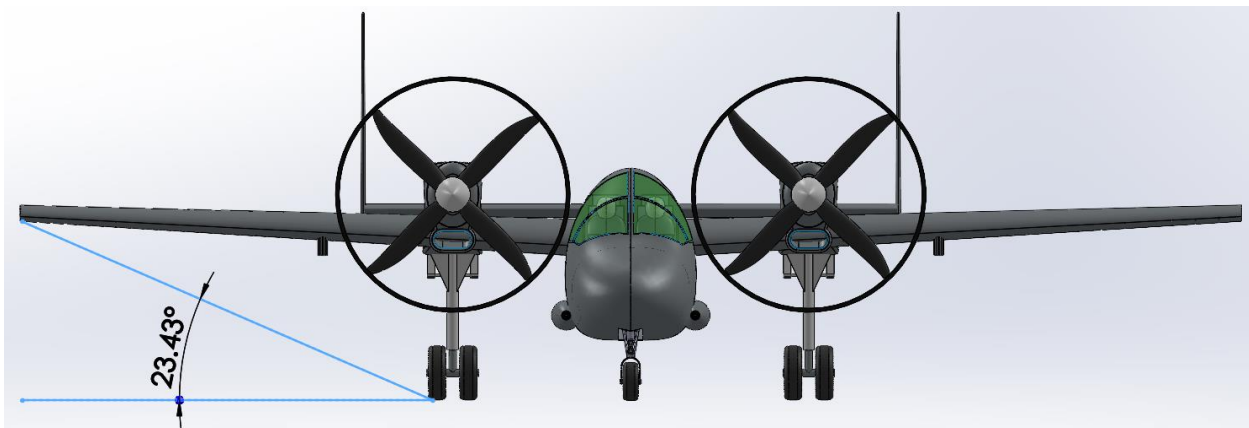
Aircraft Front View with Rollover Angle Measurement
